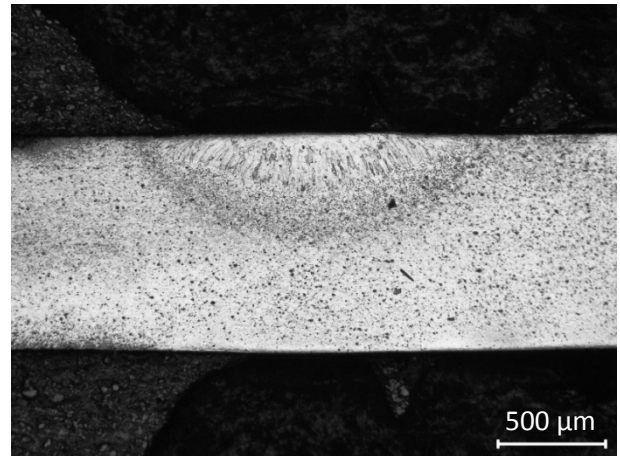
4th series of NiTi pulsed mode beads on plate – macrograph of weld bead #3
